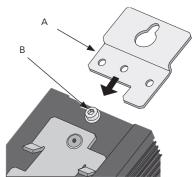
Fitting upper bulkhead mounting bracket (32A unit shown; 63A units similar)
